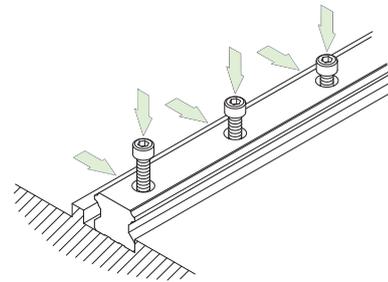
Adjusting the rail on the bed and assembly of the screws
